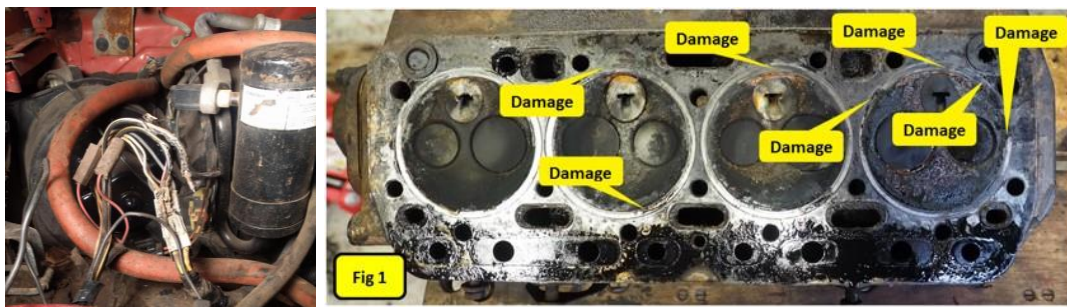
Examples of localised damage due to wire harness failure (left) and engine gasket and seal failure (right) with the image provided by a EUROMOT member.
